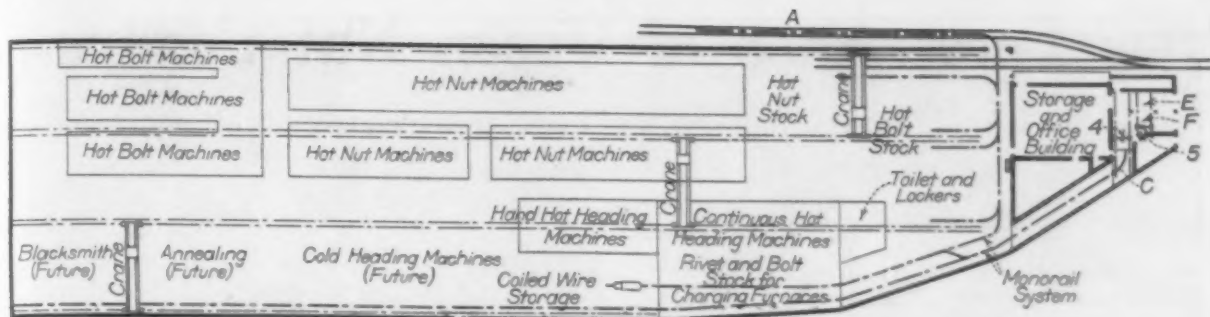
Plan to Show Traveling Cranes, Traveling Monorail System and Other Handling Apparatus
